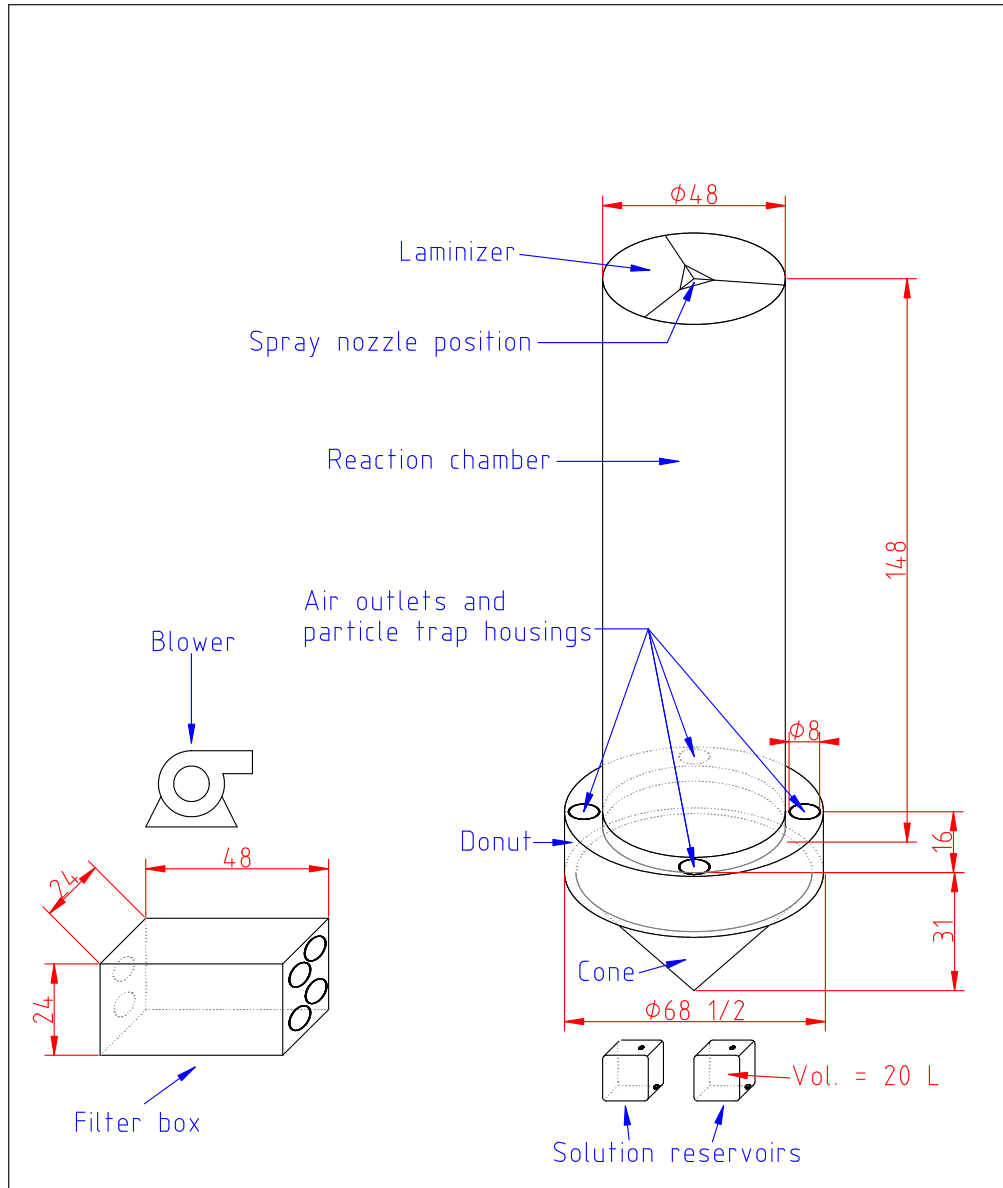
Dimensions, layout, and labeling of major components of the final prototype design. Dimensions given in inches except where noted.
